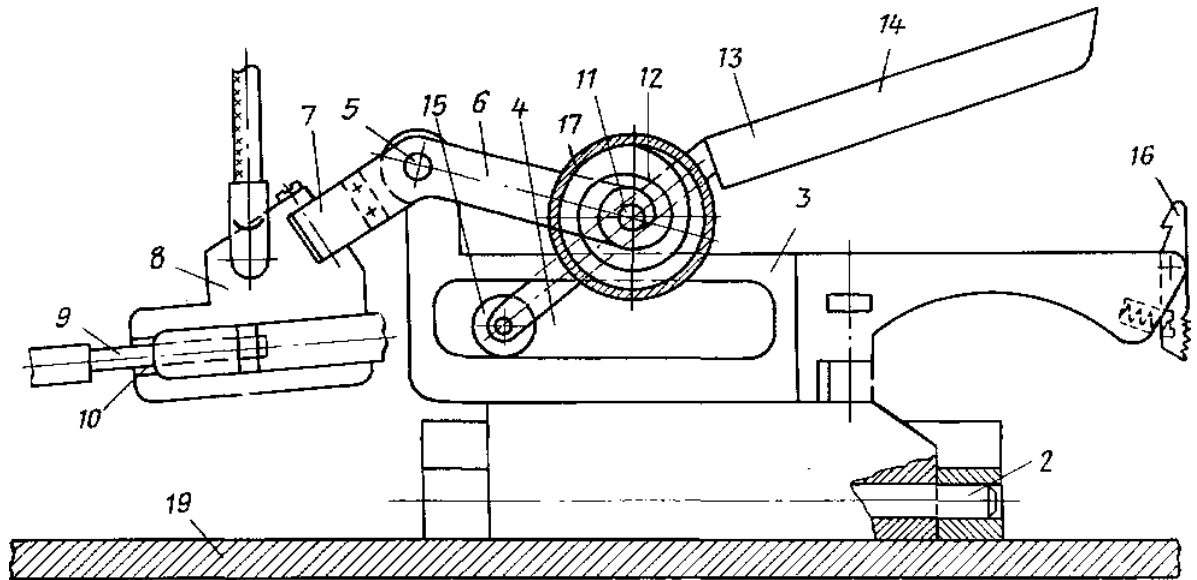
a – Device for welding with an inclined electrode side view
